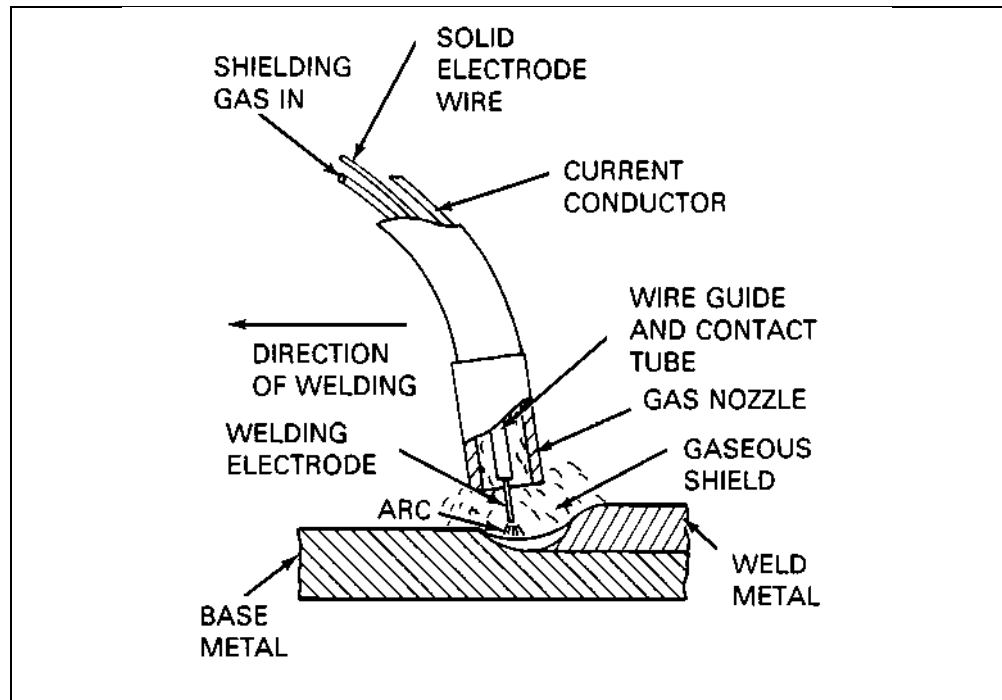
Gas Metal Arc Welding (GMAW) Process (Courtesy of the American Welding Society)
